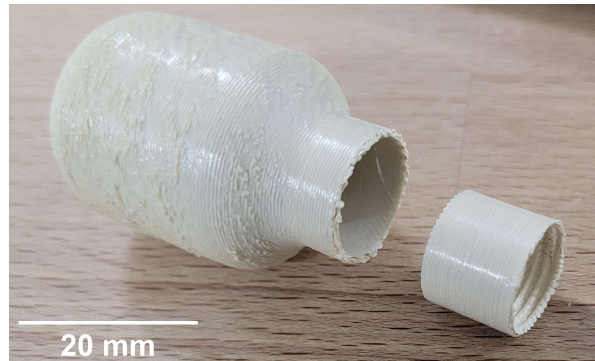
Specimen R-4-1 after printing, with the detached inner threaded base cylinder
